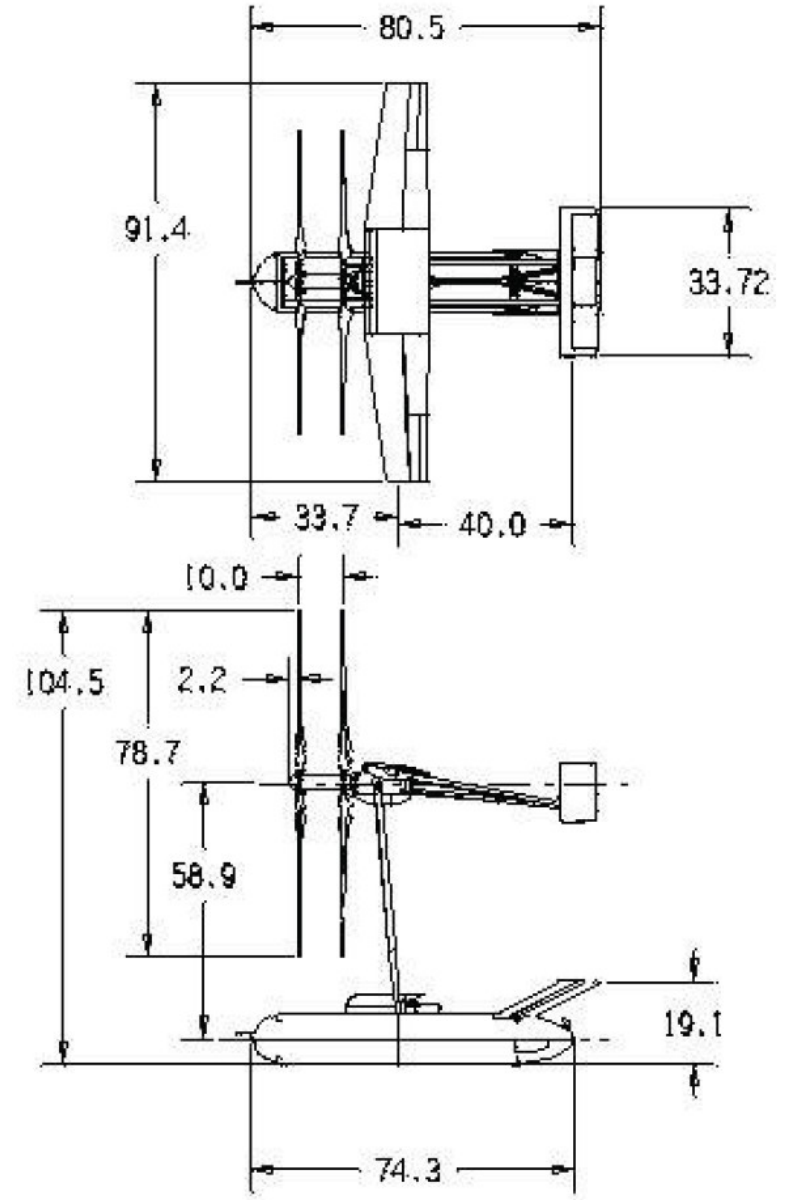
Dimensioned engineering drawing of MTR-JHL with enveloped load in cruise mode.
